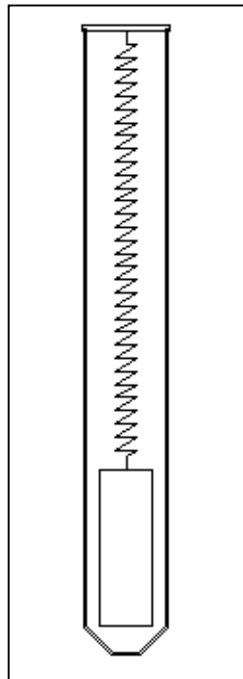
Cross Section Drawing of 4 ft Tapered Impact Damper
